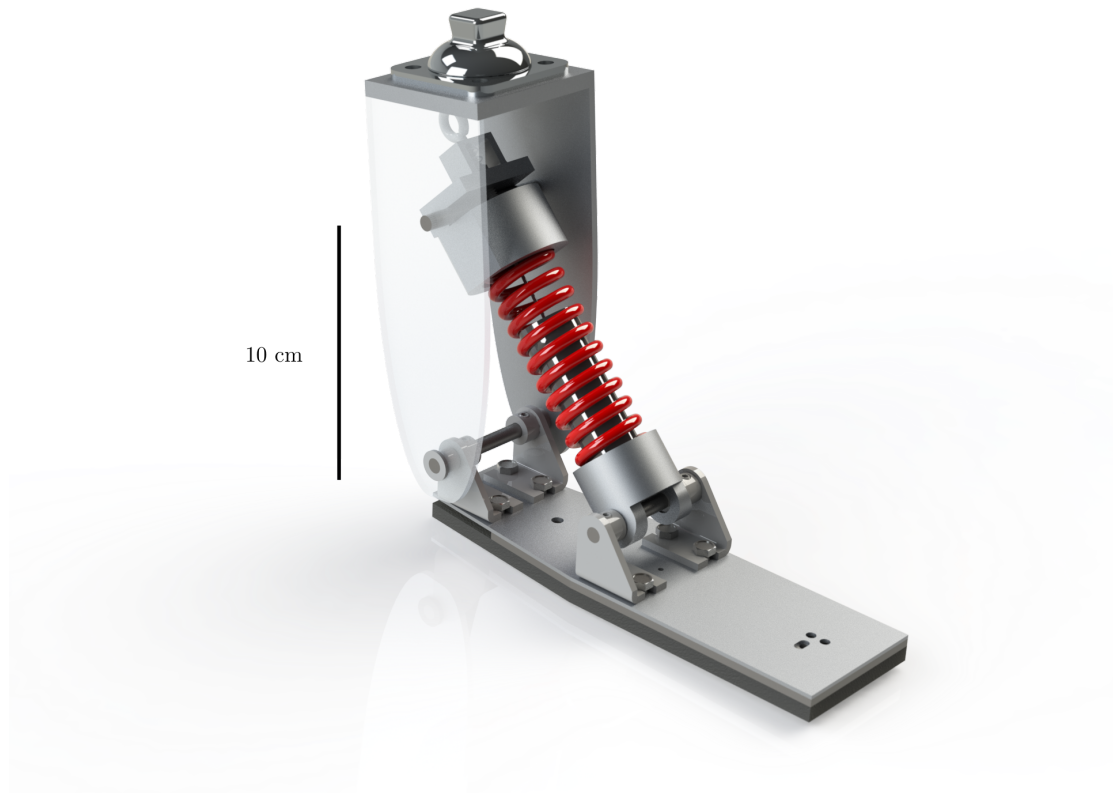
Ankle spring/damper assembly anchored to prosthesis shank and foot.
